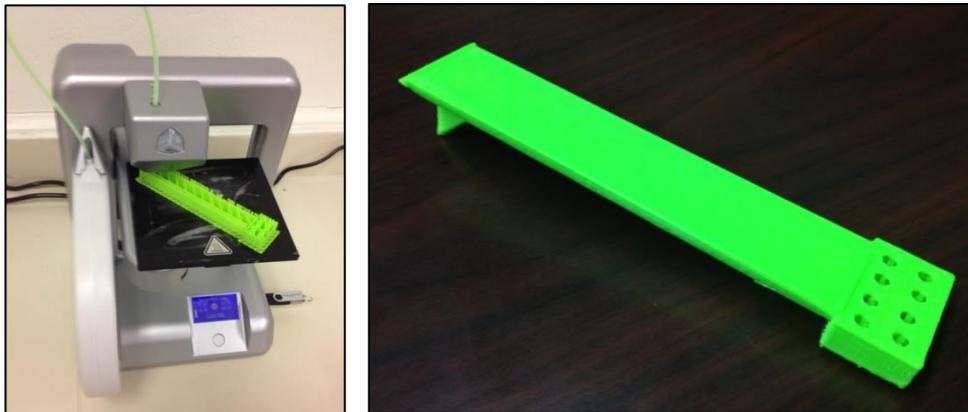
A 3D-printer fabricating a 6-inch guitar neck (left), and the finished prototype (right).
